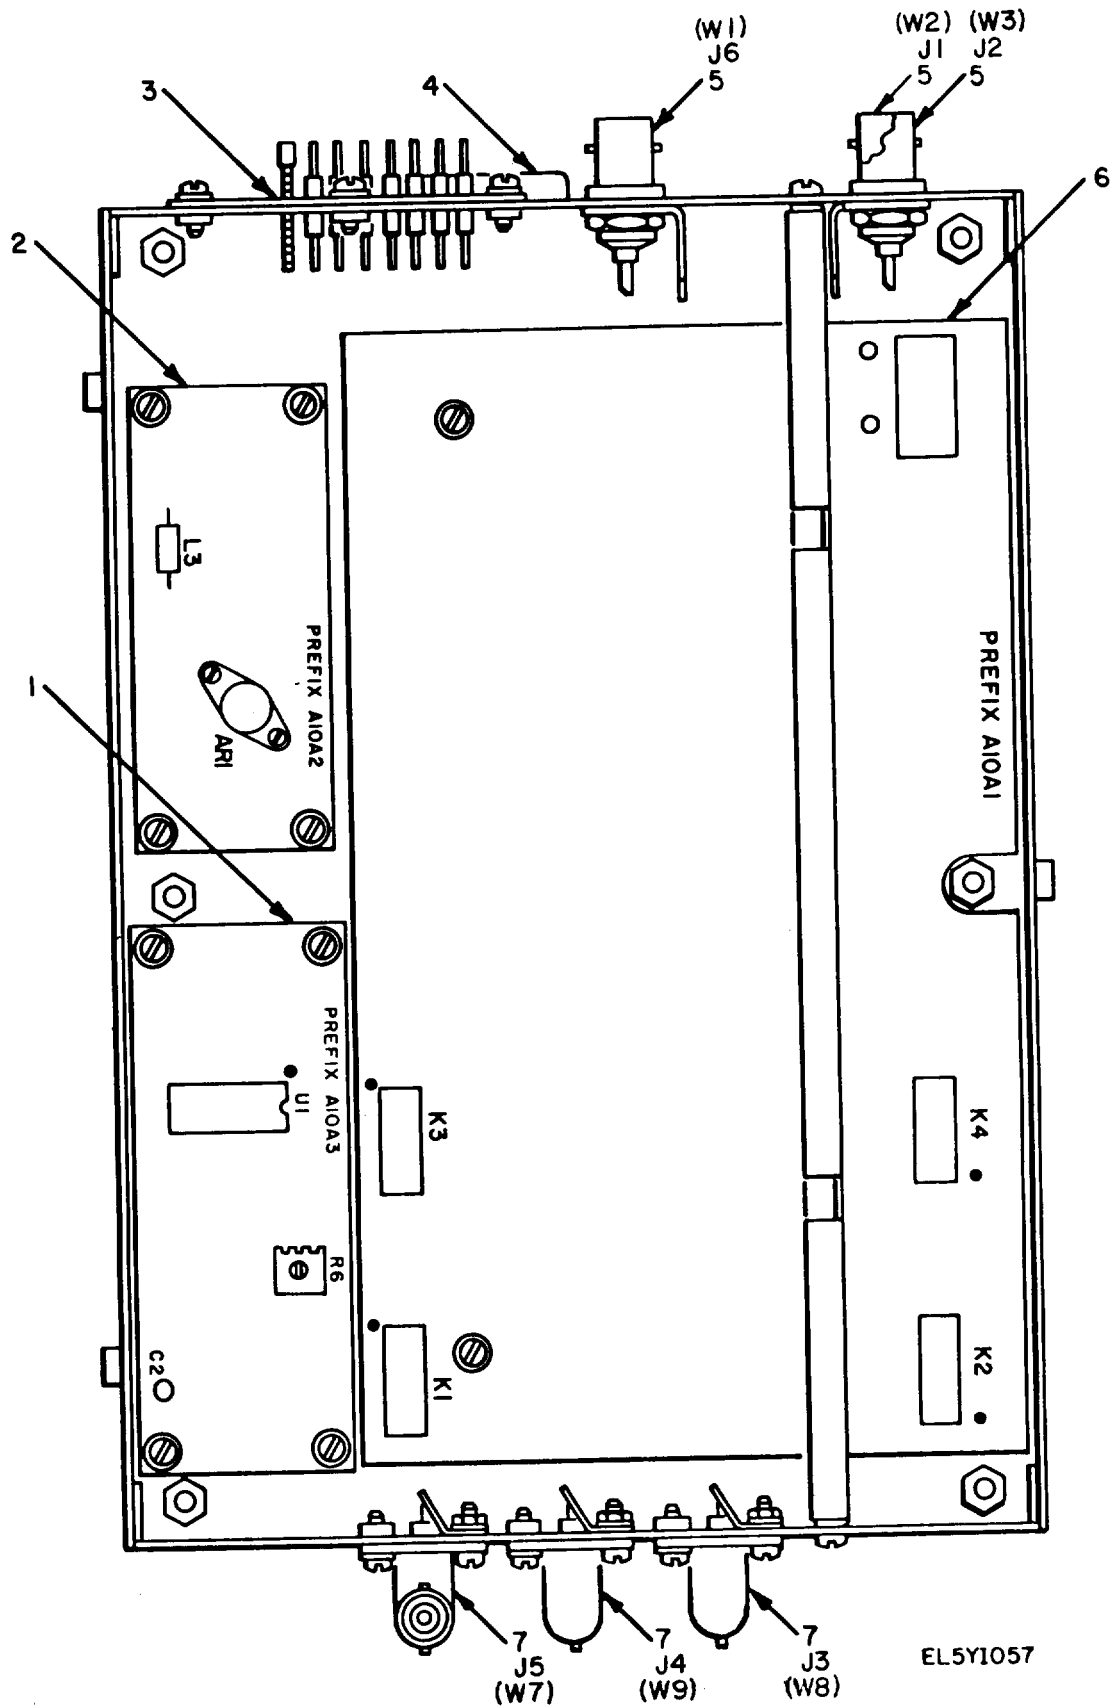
Mixer and Output Circuit Assembly A10-cover removed.
